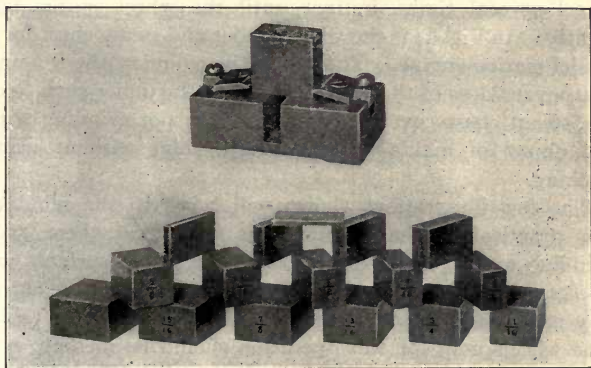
Accurate size blocks finished by spot grinding and fixture for holding them in the grinding operation.
